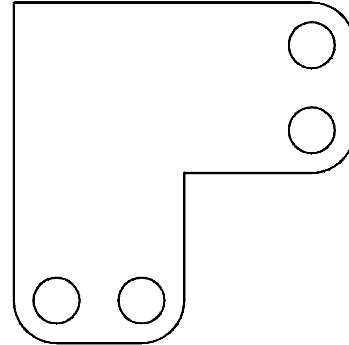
Sketch after mirroring the geometries and deleting the mirror line
